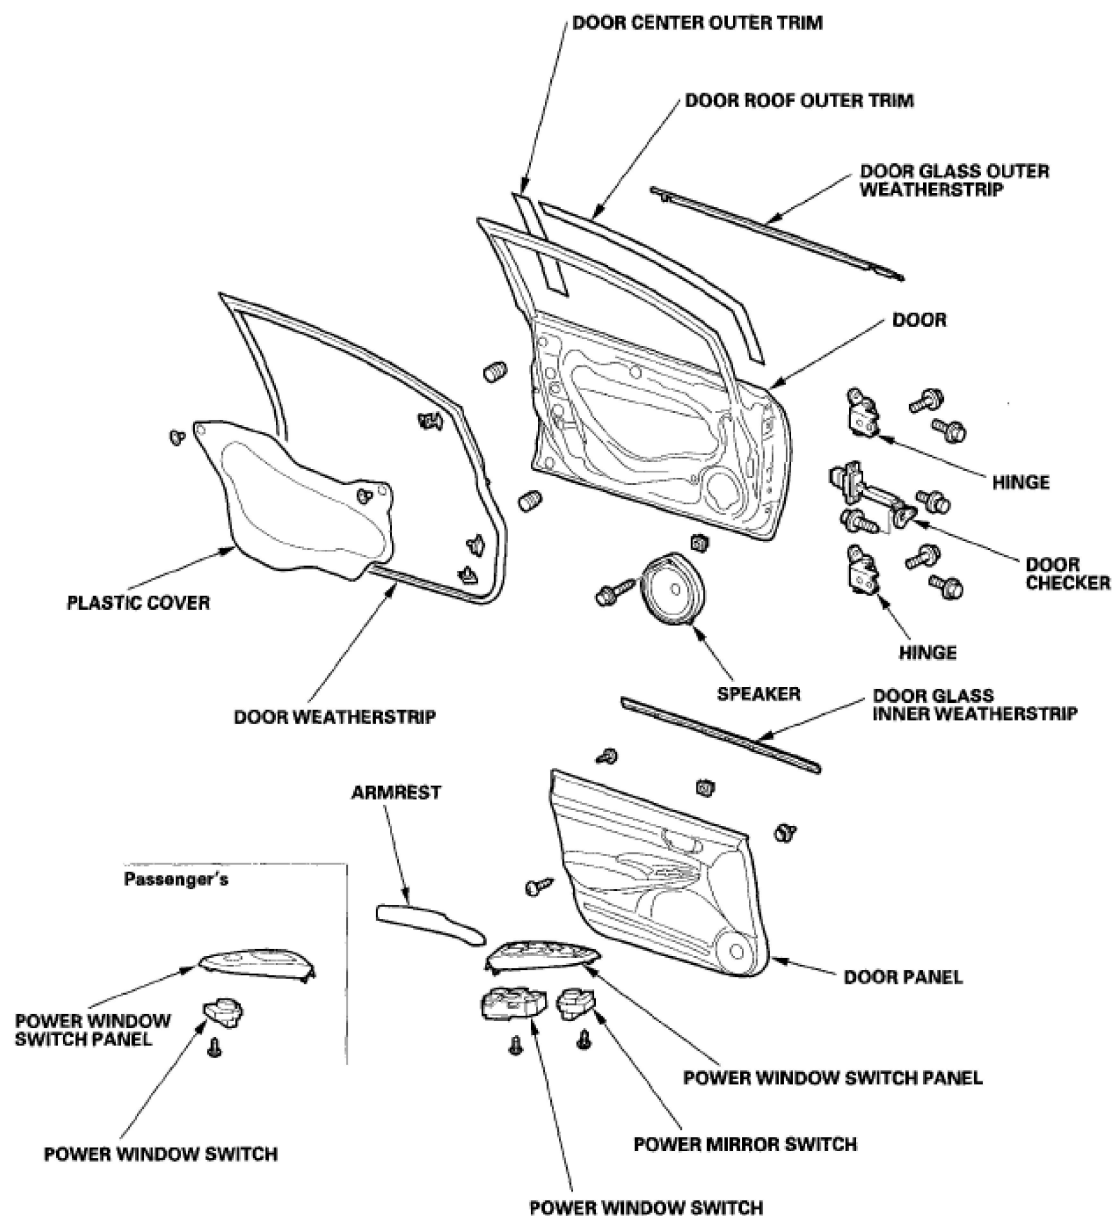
Exploded View Of Doors (2-Door - 2 Of 2)
